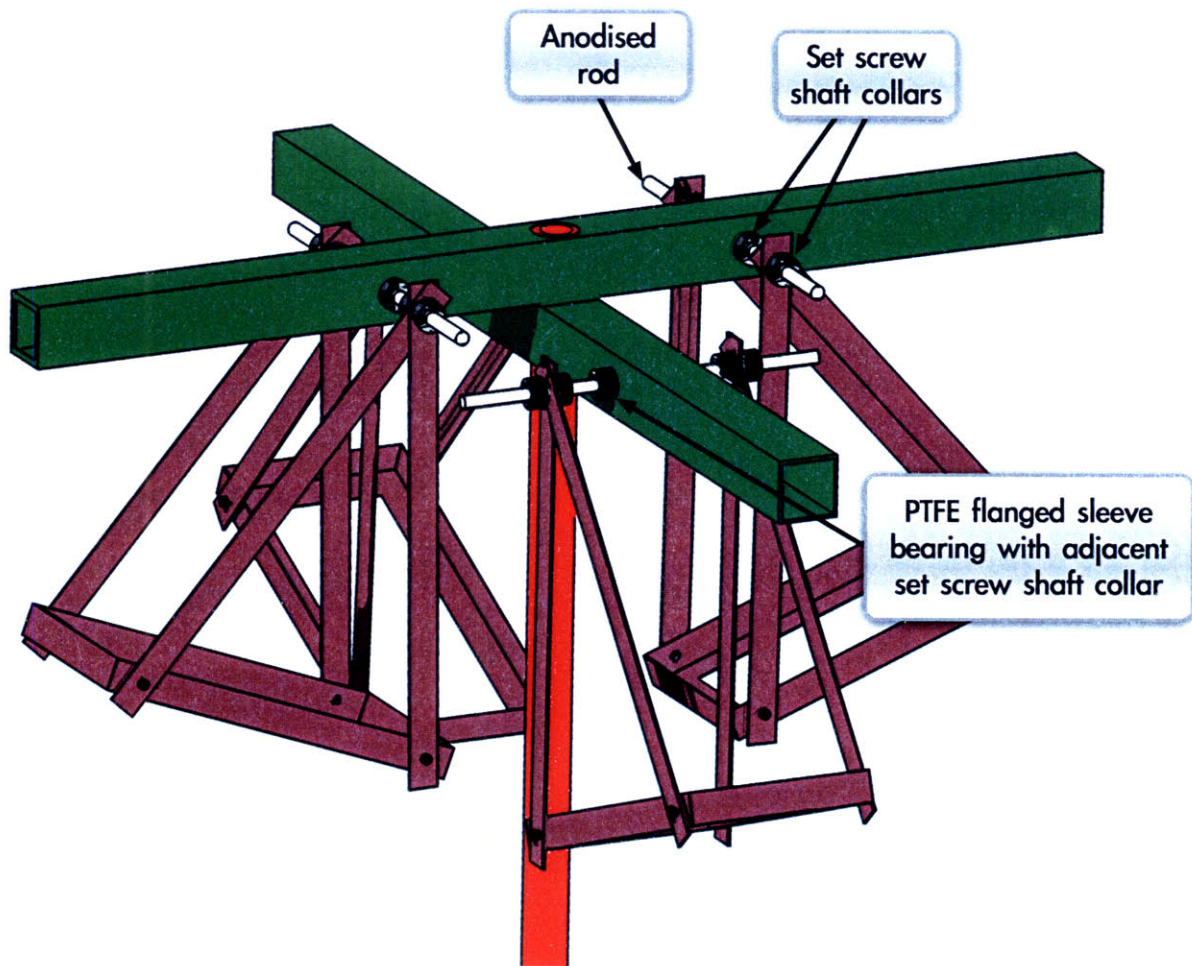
ASM holder attachments (CAD: Kendra Toole)
